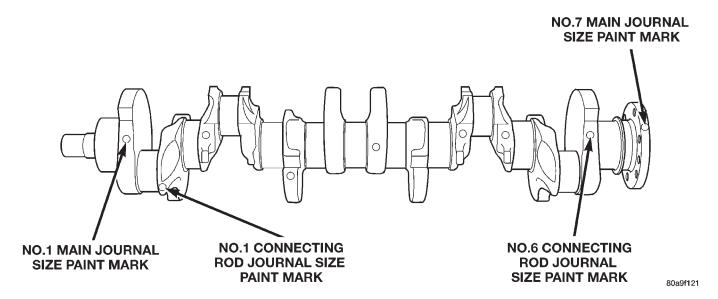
Crankshaft Journal Size Paint I.D. Location
